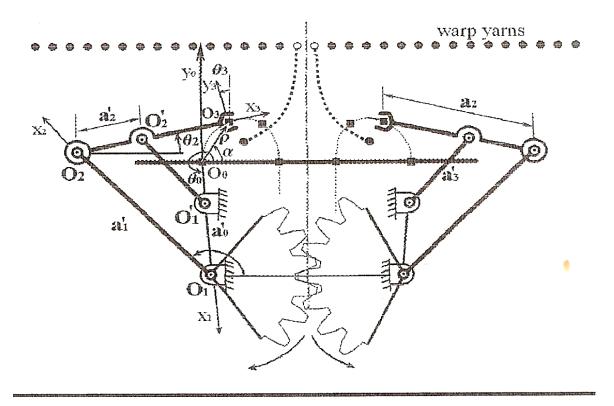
KNOTTING MECHANISMS WITH GEARS
